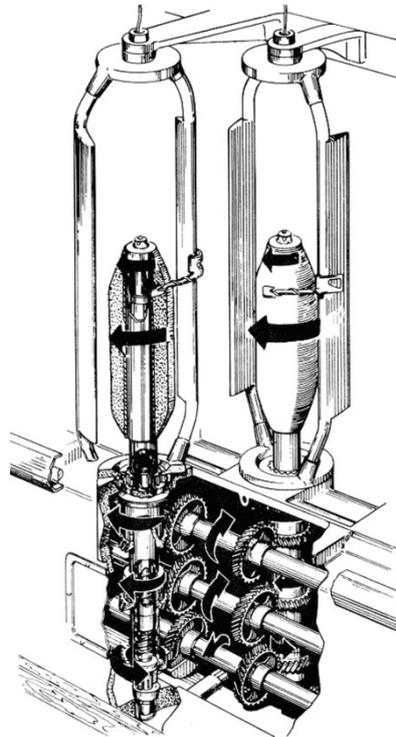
Twisted roving on a cone roving machine, showing the positive drives to the spindle and flyer. Source: Wood, 2006.
